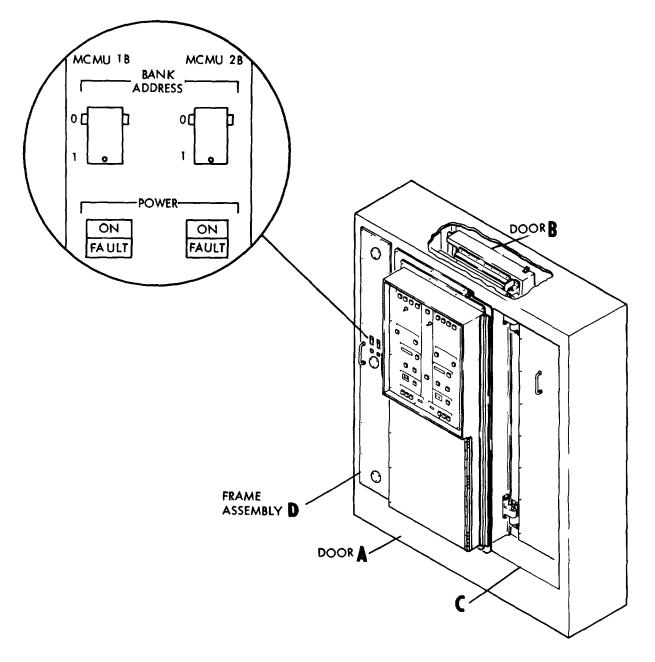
Circuit Switch ADP Assembly (Sheet 1 of 5).
